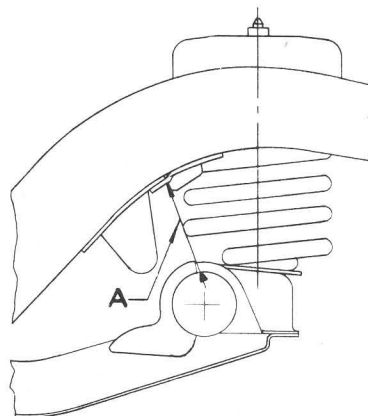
Rear Spring Trim Dimension—Series 40 & 1949 Series 50-70
